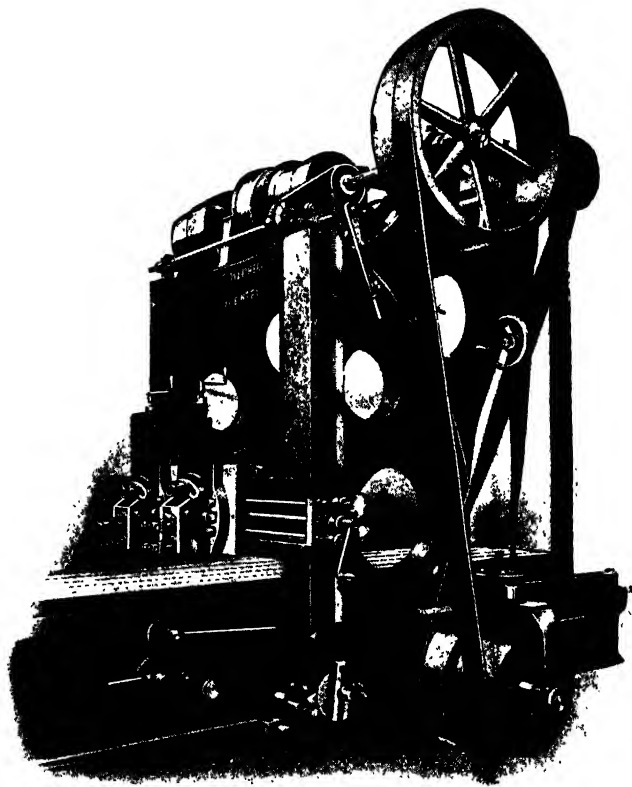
“ Butler ” No. 3 Spur-Gear-Drive Planer.
